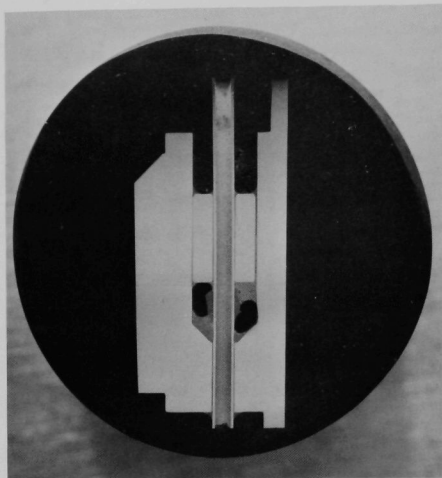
Etched Longitudinal Section through Brazed Sensor Lead in Test Bulkhead of Instrumented Subassembly XX02 (PNL-17). Gray areas at interfaces are the braze alloy. Mag. 2.5X.
